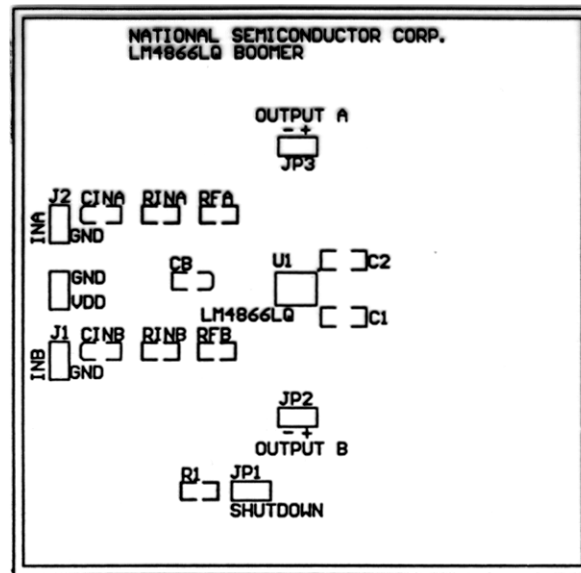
Recommended NHW PC Board Layout: Component-Side Silkscreen
